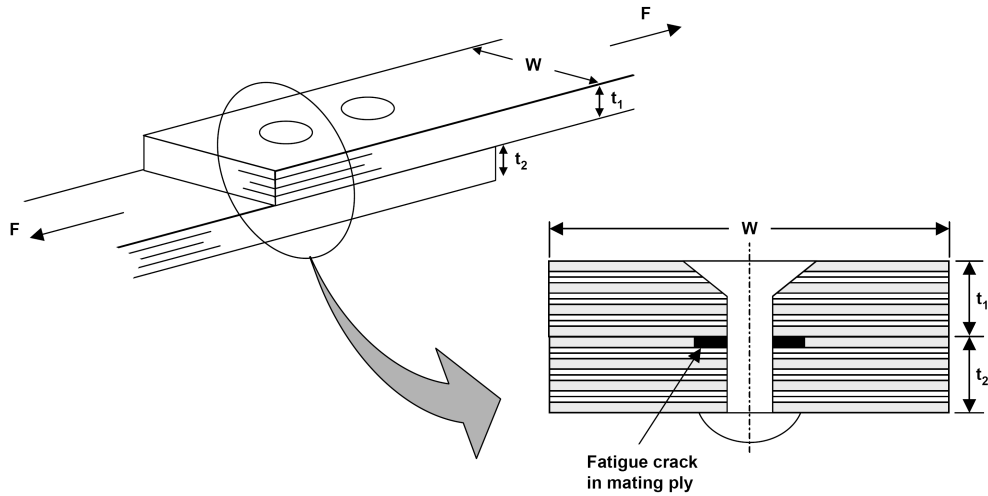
Example of riveted lap joint showing typical fatigue crack initiation location.
